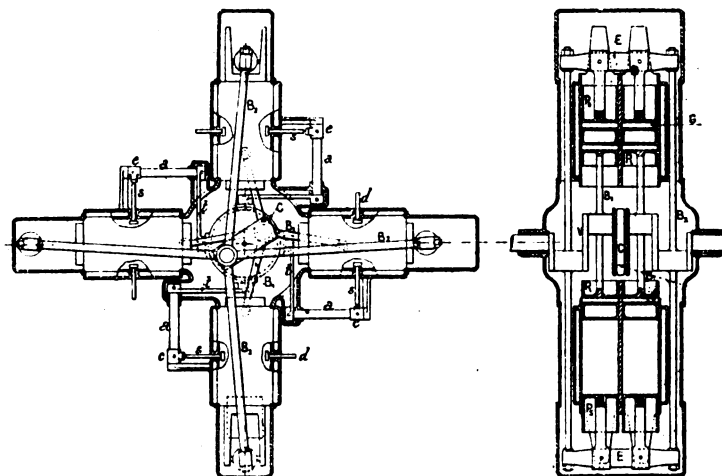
Sectional Elevations of Gobron Eight-Cylinder (sixteen piston) Aeronautical Engine.
